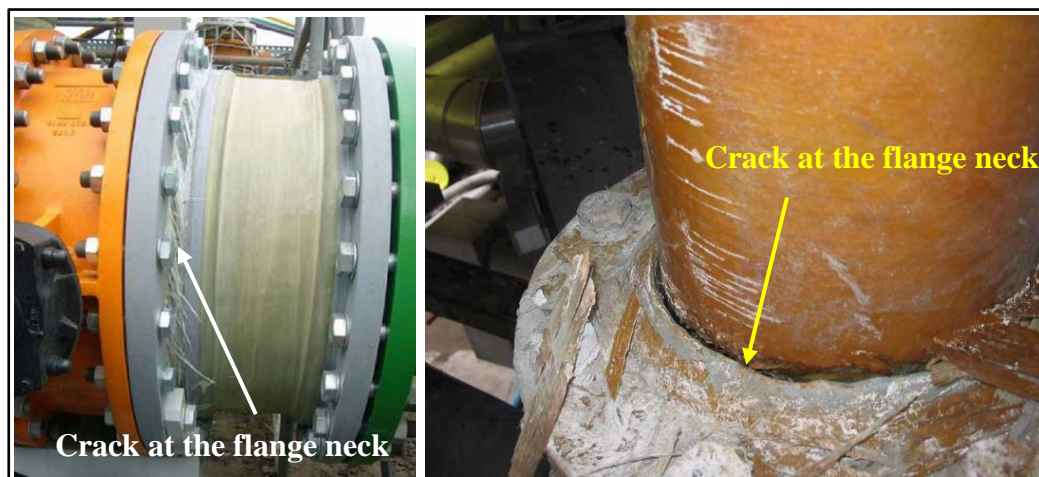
Common failure on the GFRP flanges [33]
